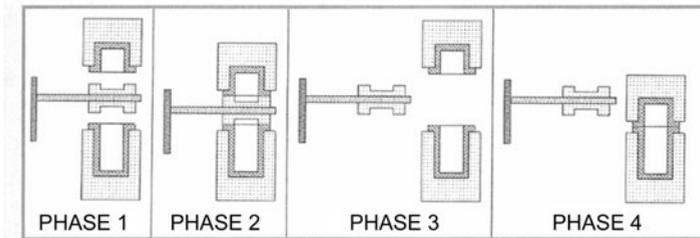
Sequence of the hot blade welding phases.
